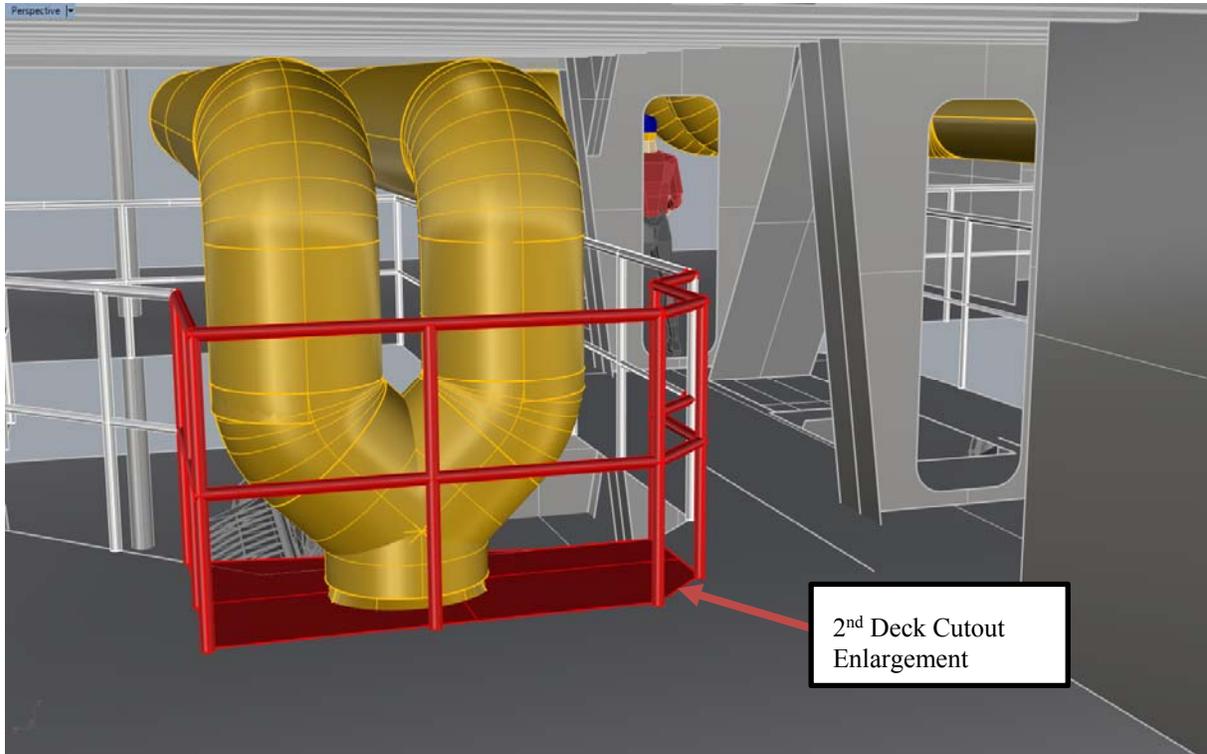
2nd Deck cutout enlargement; Second Deck at FR 120 looking forward (port shown, starboard similar)
